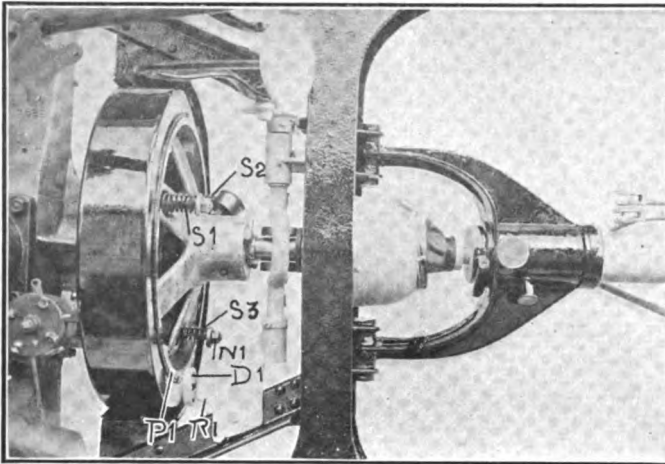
Plan of the chassis at the combination cross-bar, showing cone clutch in flywheel, controlling mechanism and universal joint
